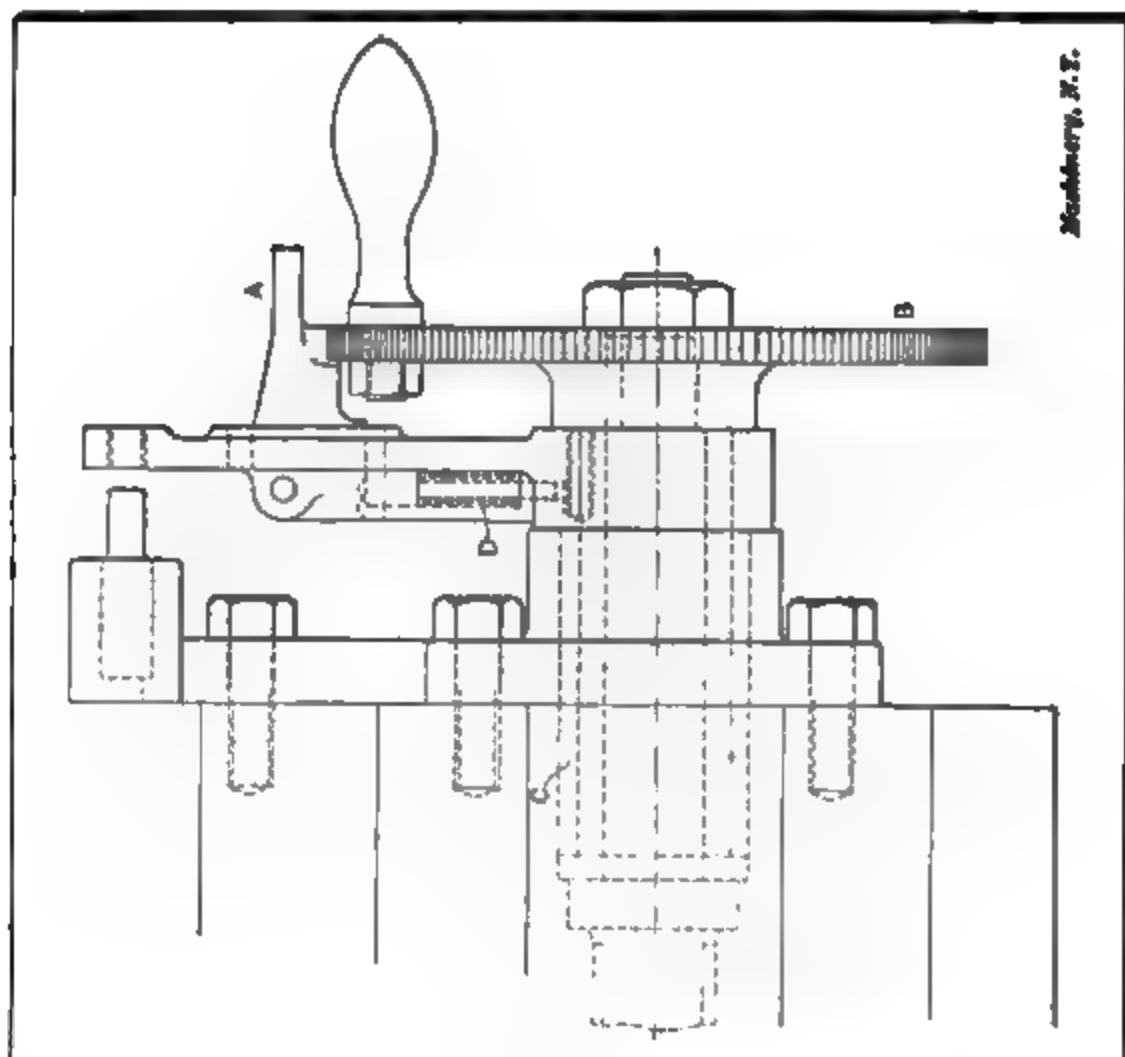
Locking Arrangement for Quick Withdrawal Device on Threading Lathe
